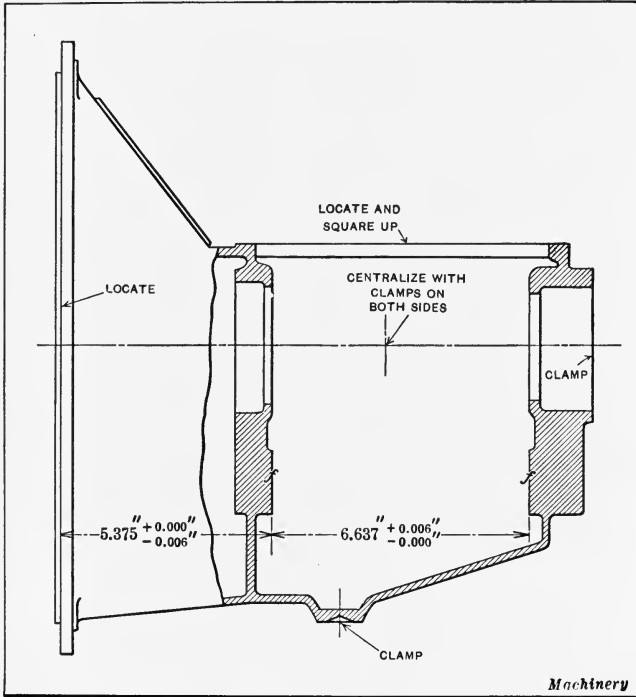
Operation Drawing showing Methods of locating and clamping Work for Seventh Operation
